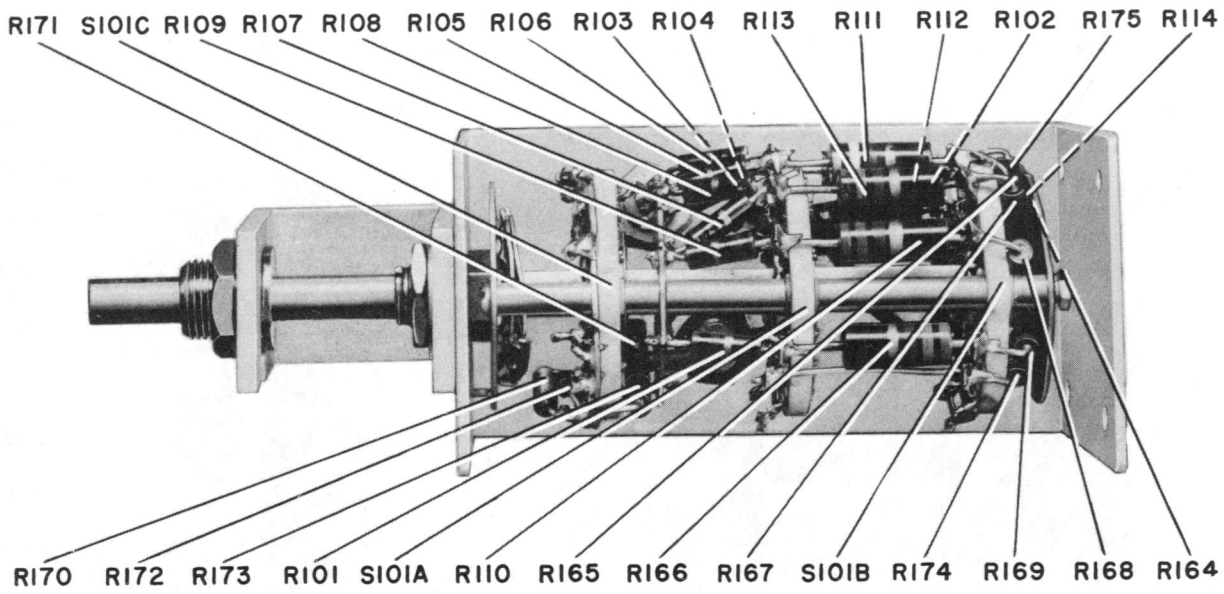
Component Locations, Interior of Attenuator Assembly
